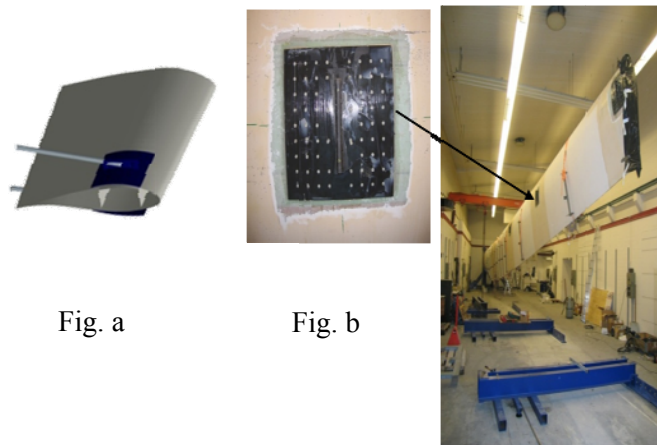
Load application at the blade. Fig. a: scheme of anchor plates. Fig. b: anchor plate glued to the blade at 18.61m.
